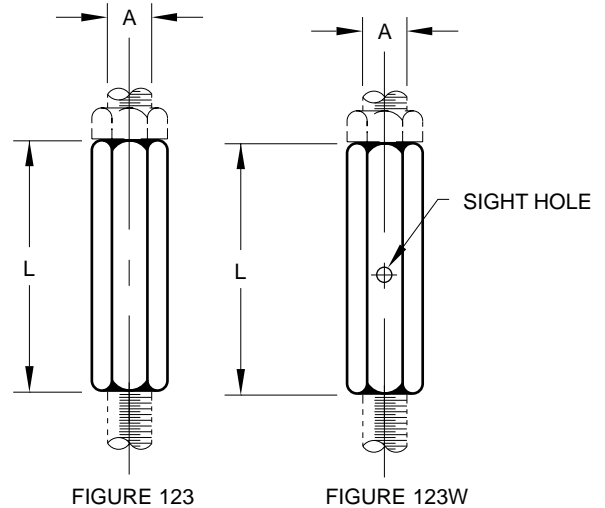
is used to connect rods up to 1½ inch diameter. The Rod Coupling is made of carbon steel and can be welded to the rod after assembly. The Figure 123W has a sight hole mid length to allow for determining depth of thread engagement.
